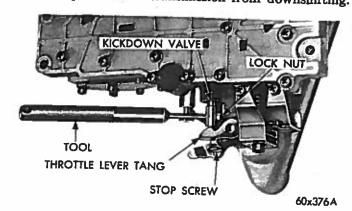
Throttle Pressure Adjustment (Tool C-3763)
